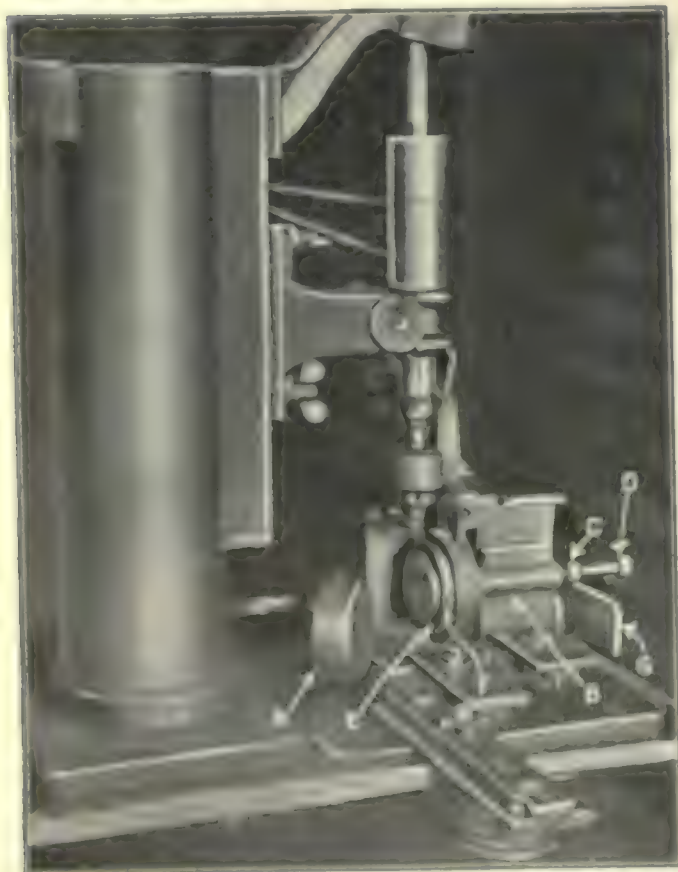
SIDE VIEW OF DRILLING FIXTURE
